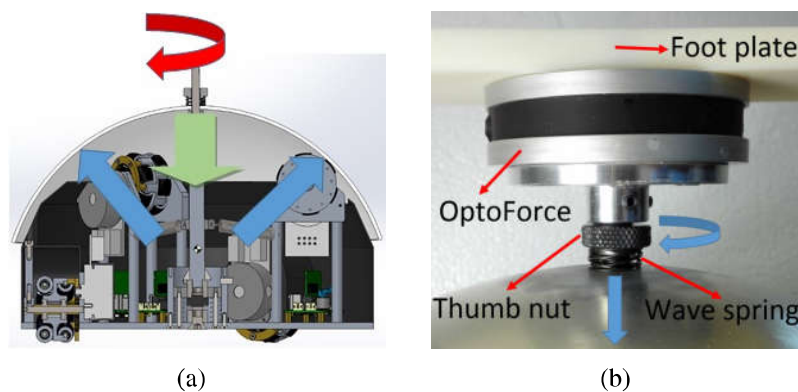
(a) Force transmitted diagram; (b) detailed view of components in the adjustable mechanism.
